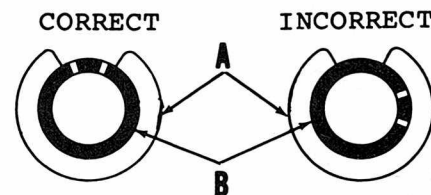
Drive shaft bushing (1—Fig. S14-11) must be installed with holes toward top for proper lubrication of transmission.
